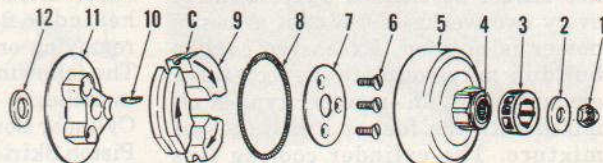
Exploded view of the clutch used on direct drive models.
